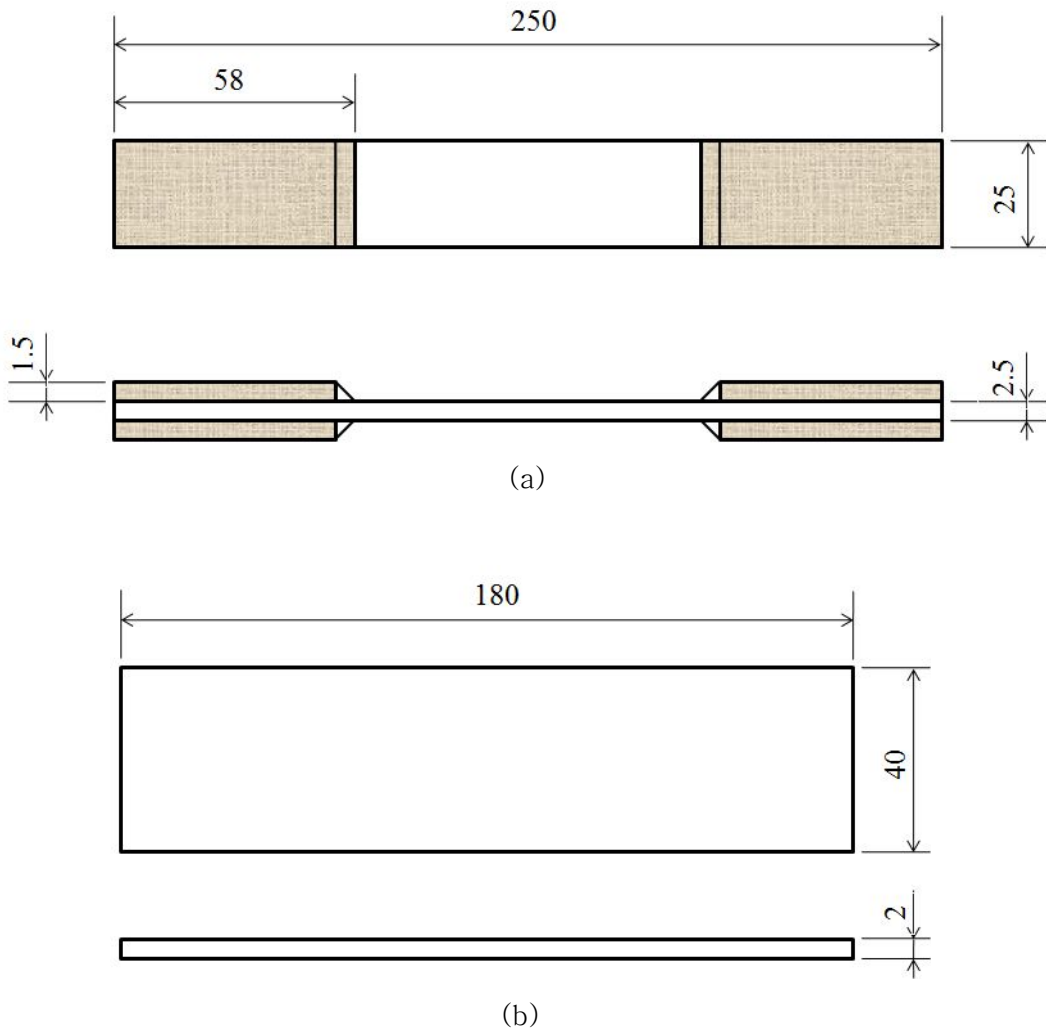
Specimen of Tensile Test(a) and Bending Test(b)
